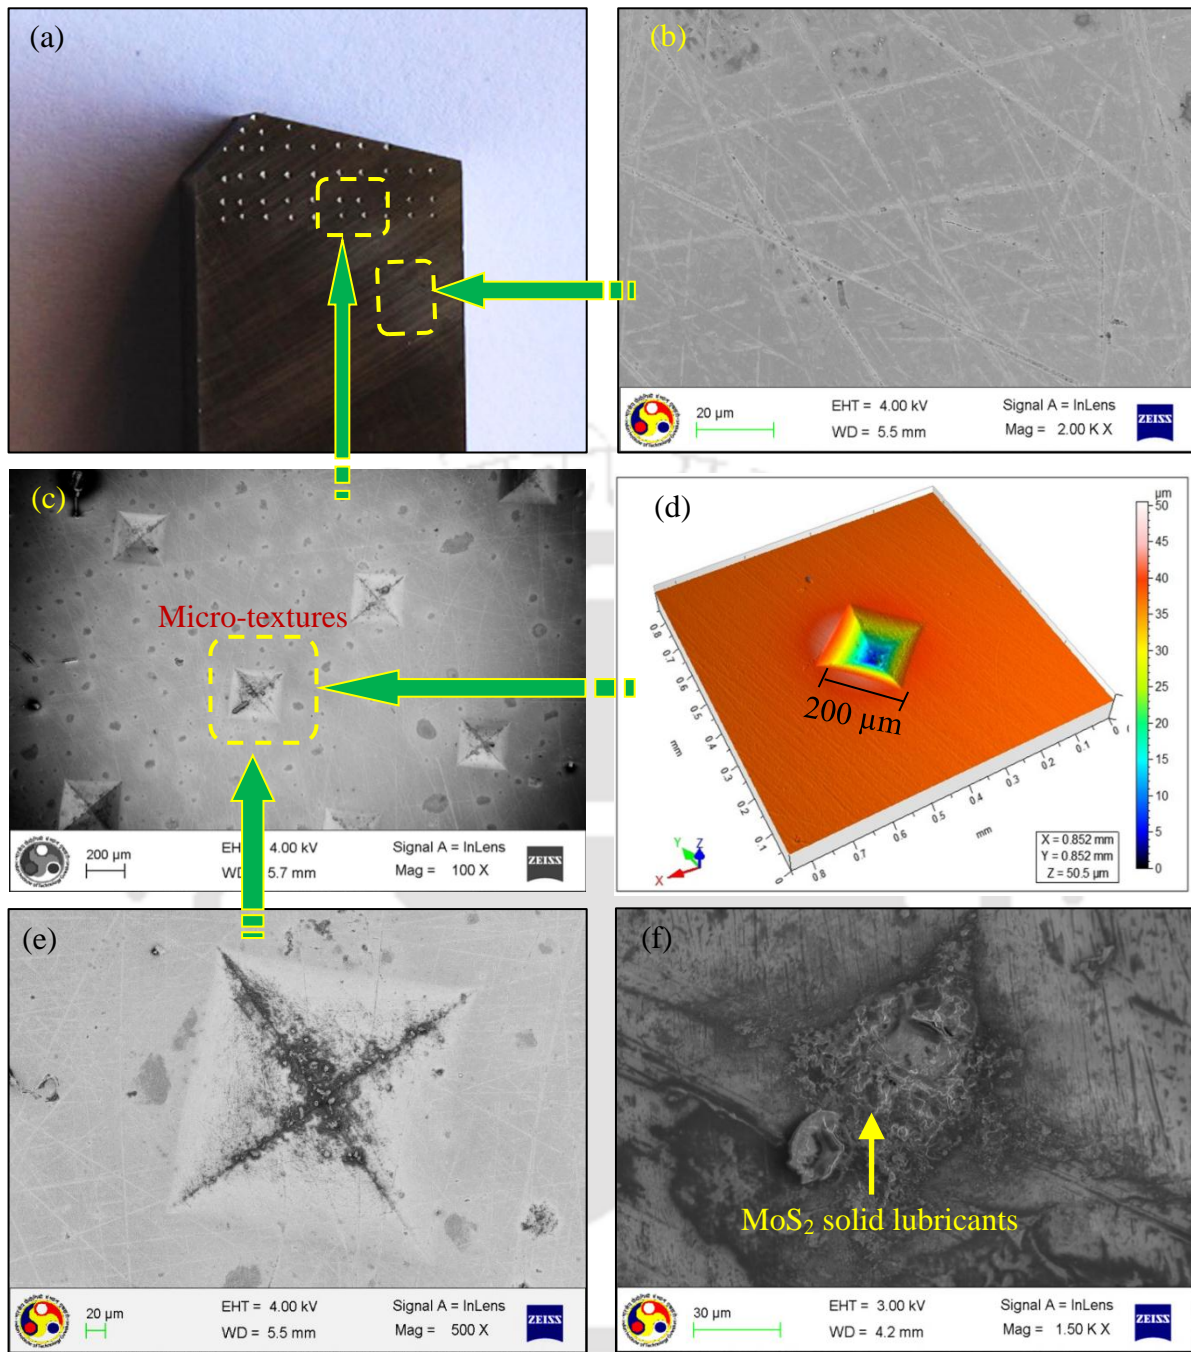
Mechanical micro-textured cutting tool (a) overview of mechanical micro-textures on the rake surface of cutting tool (b) surface morphology of un-textured tool rake surface, (c) array of mechanical micro-textures on tool rake surface, (d) 3-D surface profile of single mechanical micro-texture along with dimension, (e) surface morphology of a single uncoated mechanical micro-texture, and (f) surface morphology of a single MoS₂ solid lubricant filled mechanical micro-texture
